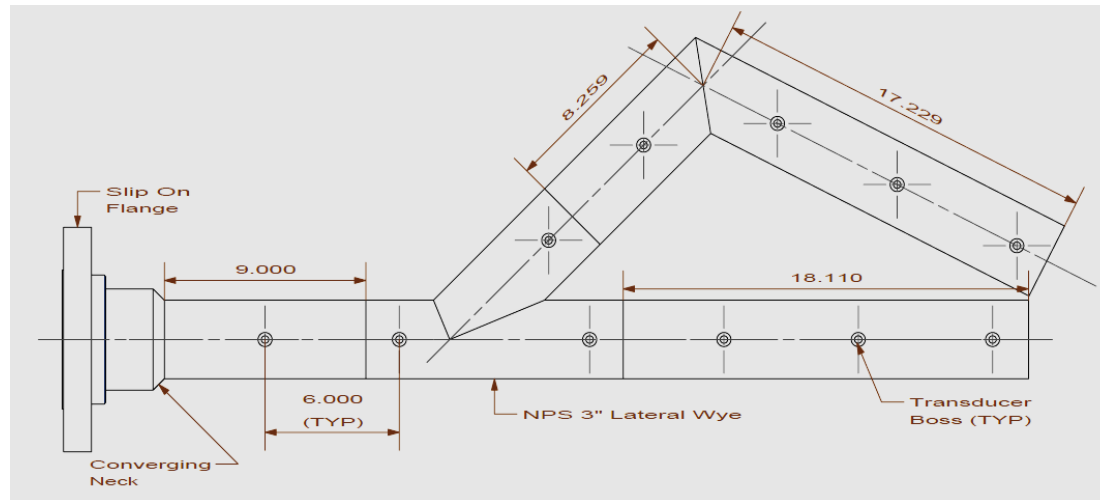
Machine drawing of the diffuser prototype. Dimensions in inches.
